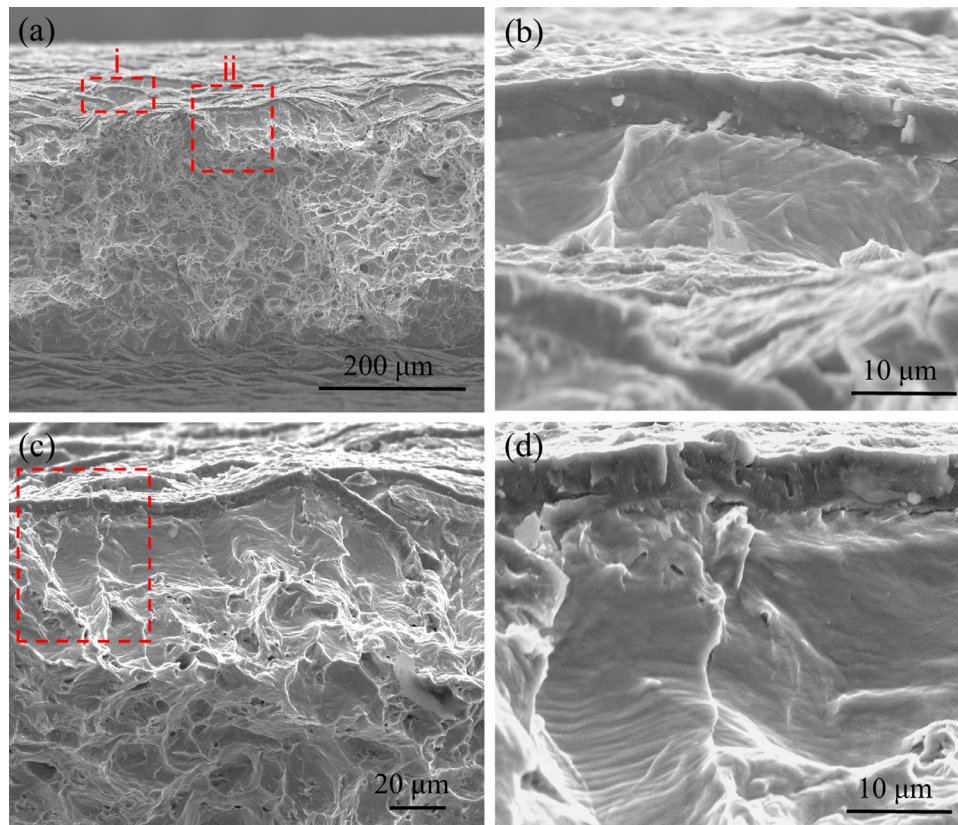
Fatigue fracture surface of the TiCrAlN-coated Zr-4 alloy after testing: (a) a view under low magnification, (b) a magnified view of area i in (a) showing the surface crack near the fracture surface, (c) a magnified view of area ii in (a) showing the crack initiation and propagation zones, and (d) a view of the crack propagation zone under high magnification.
